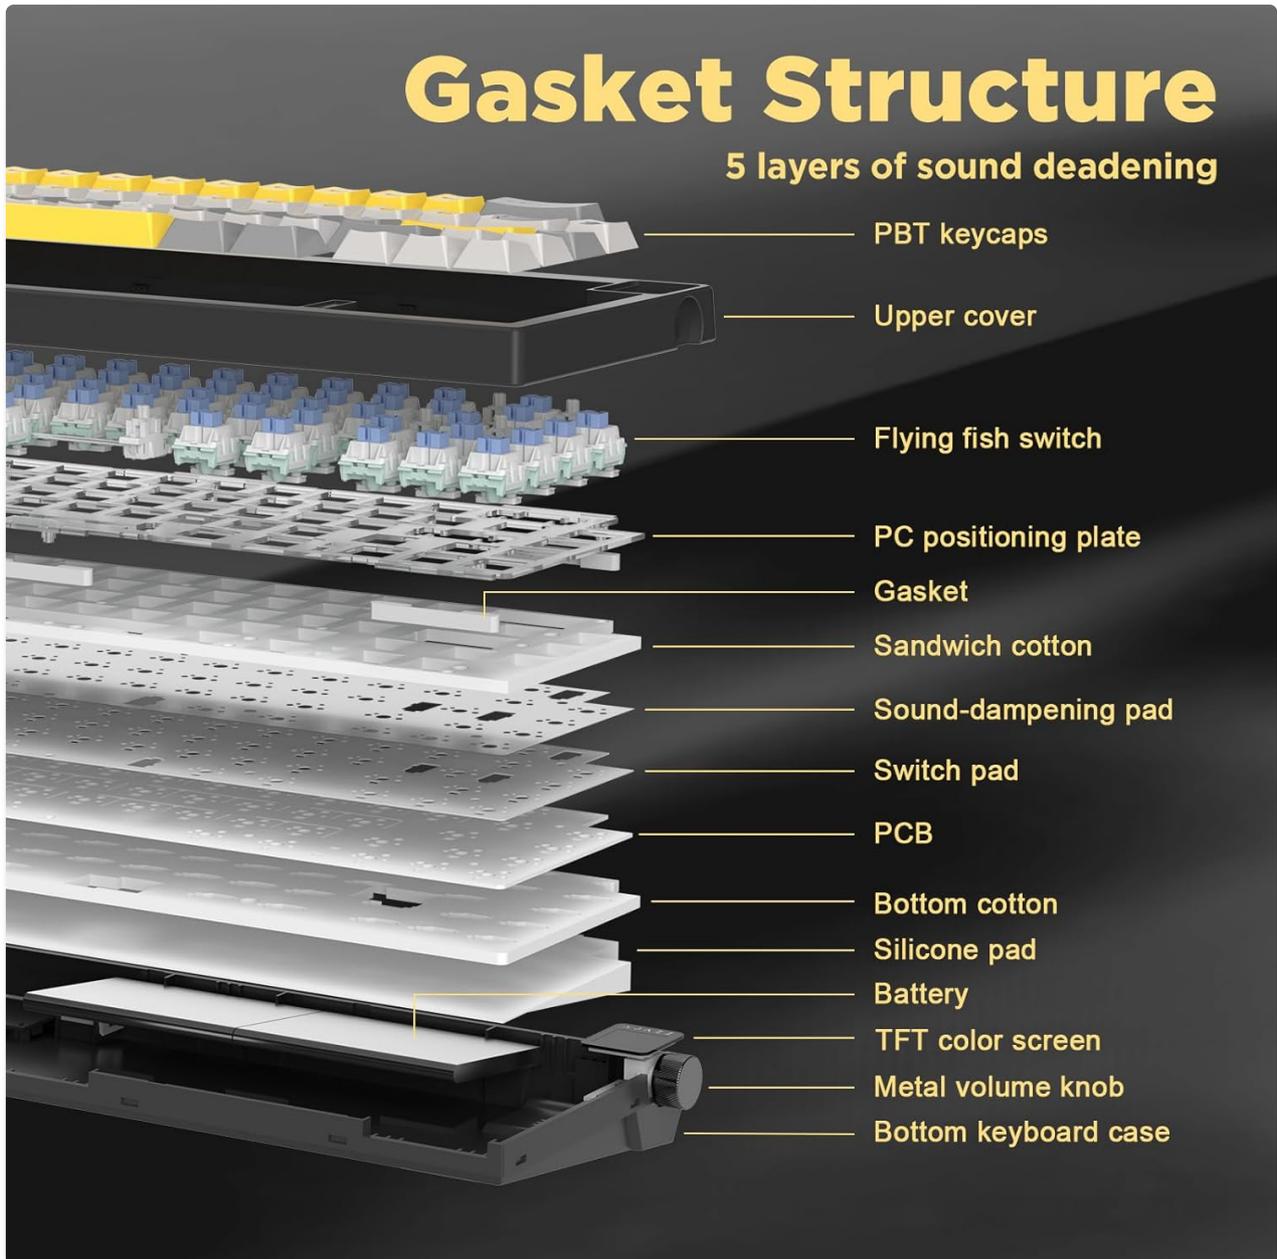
Exploded view of the AK650's 5-layer gasket structure for enhanced typing feel and sound dampening.
